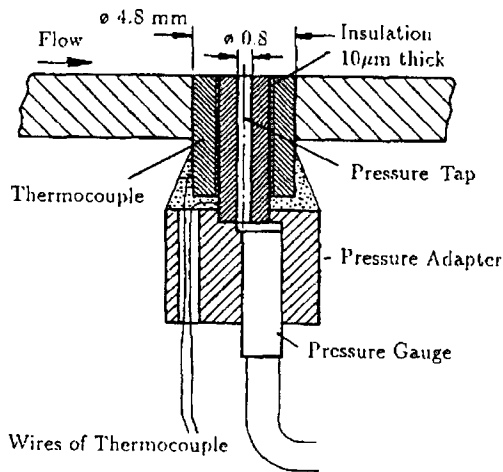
Coaxial surface thermocouple with integrated pressure gauge [9]
